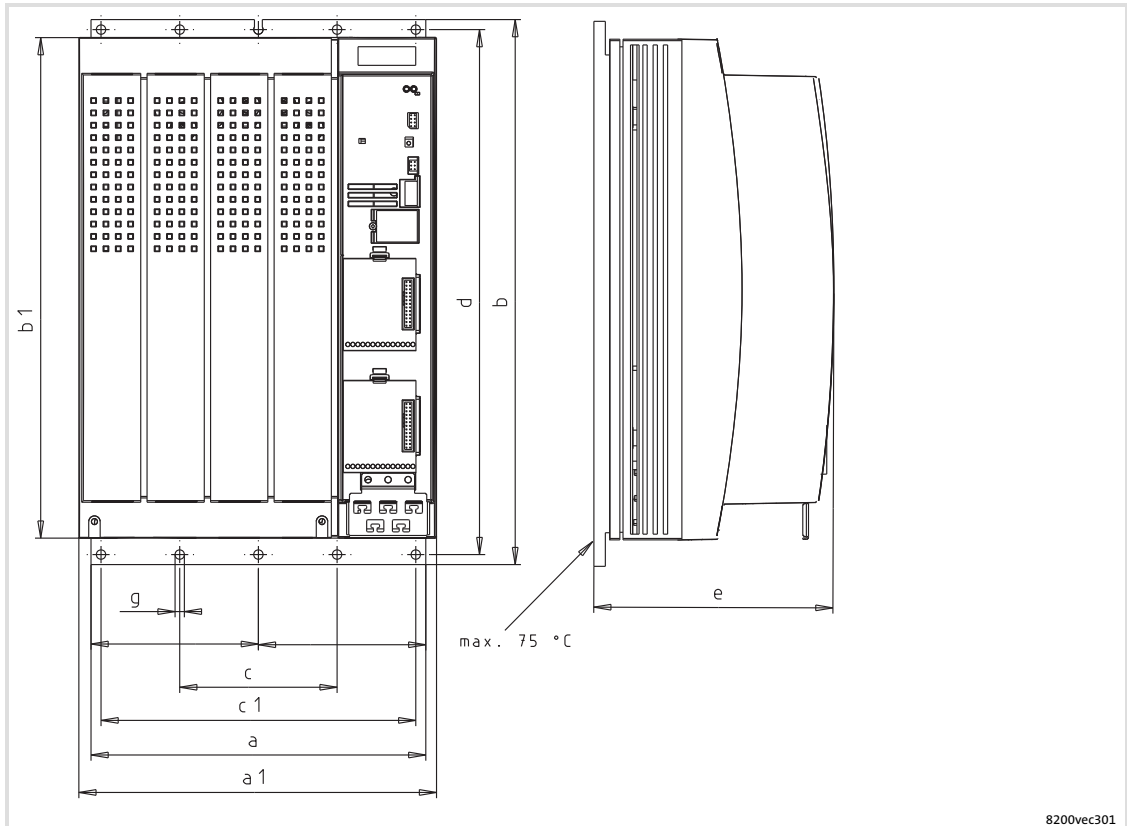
Dimensions for installation in "cold-plate design" 15 ... 22 kW
